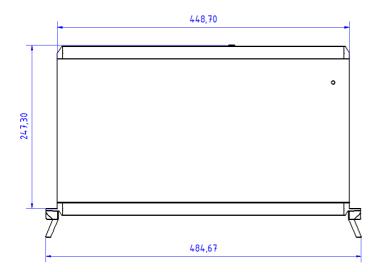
RT-800, mechanical dimensions (tabletop version)
